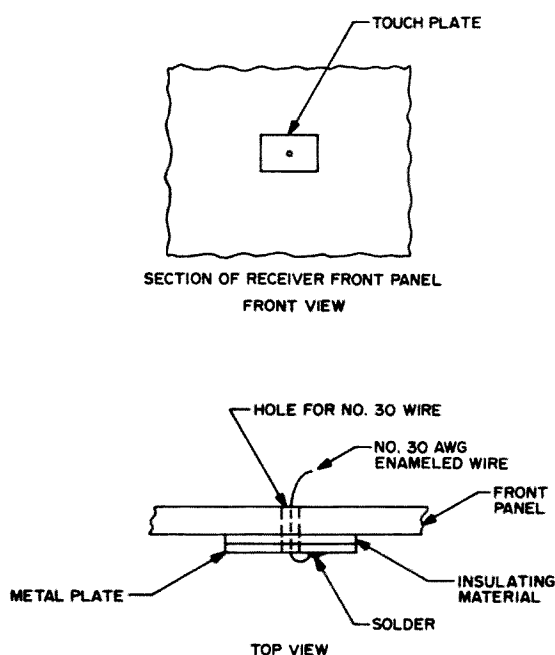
Details of construction of a touch plate which can be mounted on a receiver front panel.
